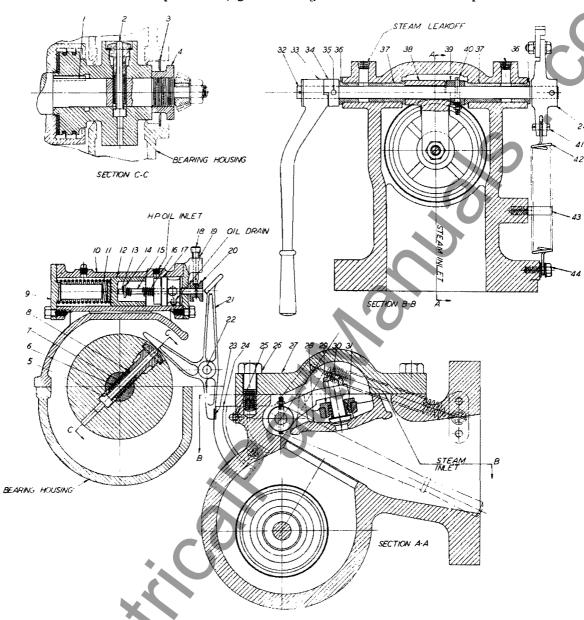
Auto Stop and Quick Closing Valve Assembly
